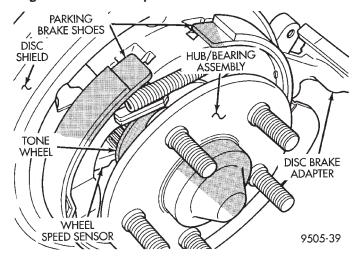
Rear Wheel Speed Sensor With Disc Brakes
